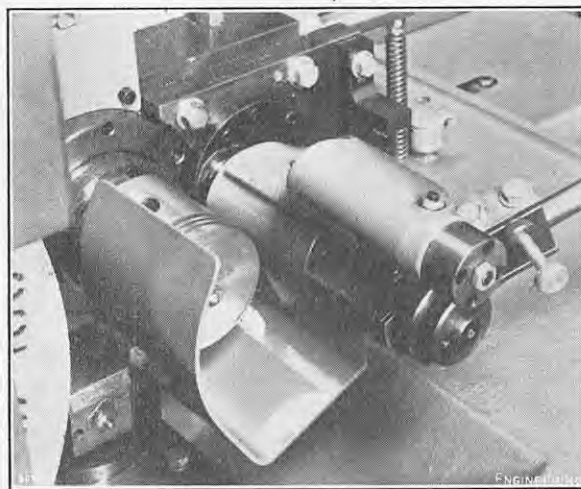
CENTRING DEVICE SWUNG CLEAR FOR LOADING PISTON.
